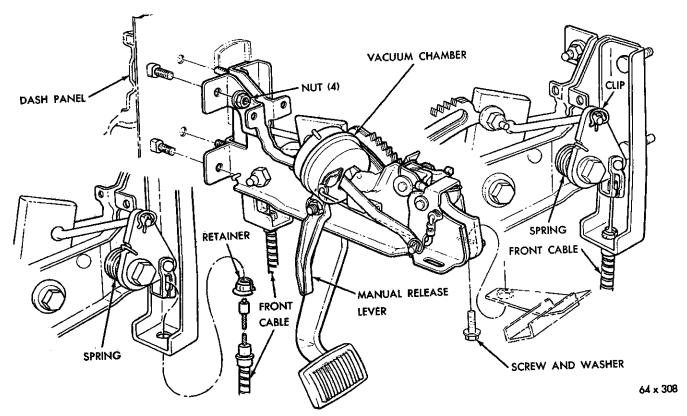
Foot Operated Parking Brake (Imperial) (Disassembled)
